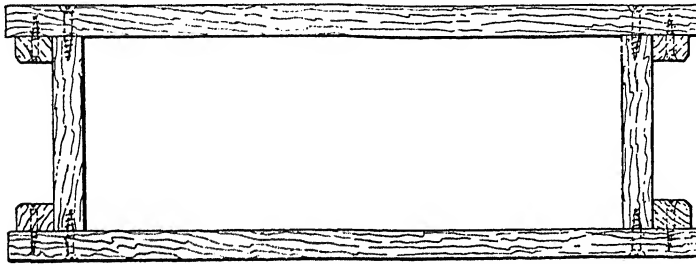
Wooden Core Box, with Ends Recessed, and Bolts
